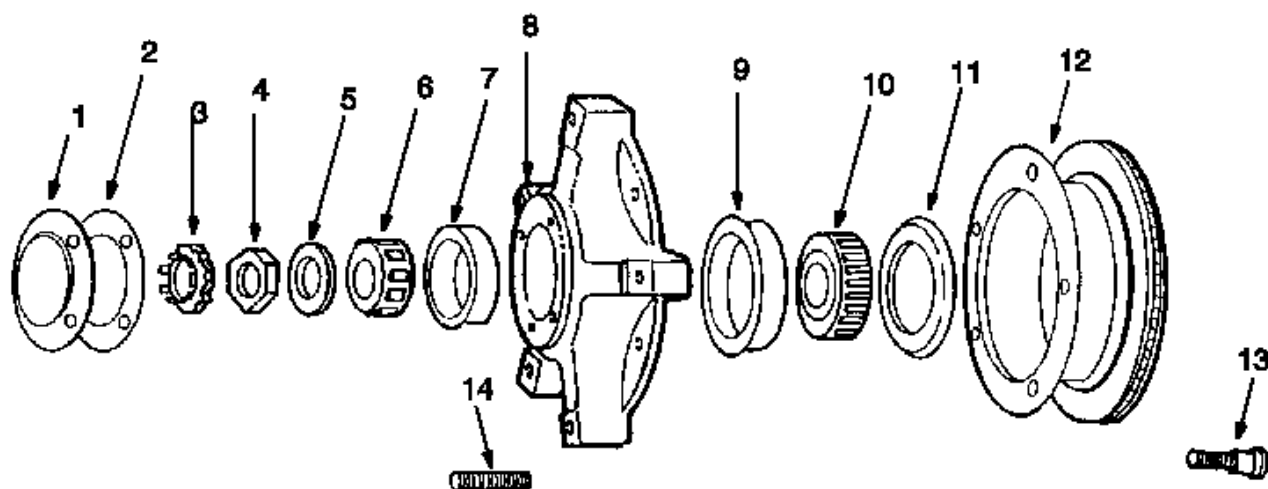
Exploded View of Typical Cast Spoke Front Hub Assembly with Disc Brakes
